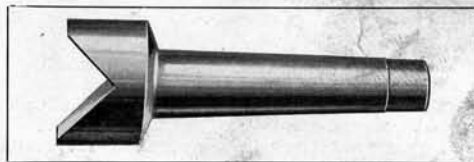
Solid V Center. Head is $1\frac{1}{16}$ " dia. and has groove 90° included angle $\frac{7}{8}$ " wide. Used in tailstock for holding cylindrical work when drilling and spotting to transverse center
